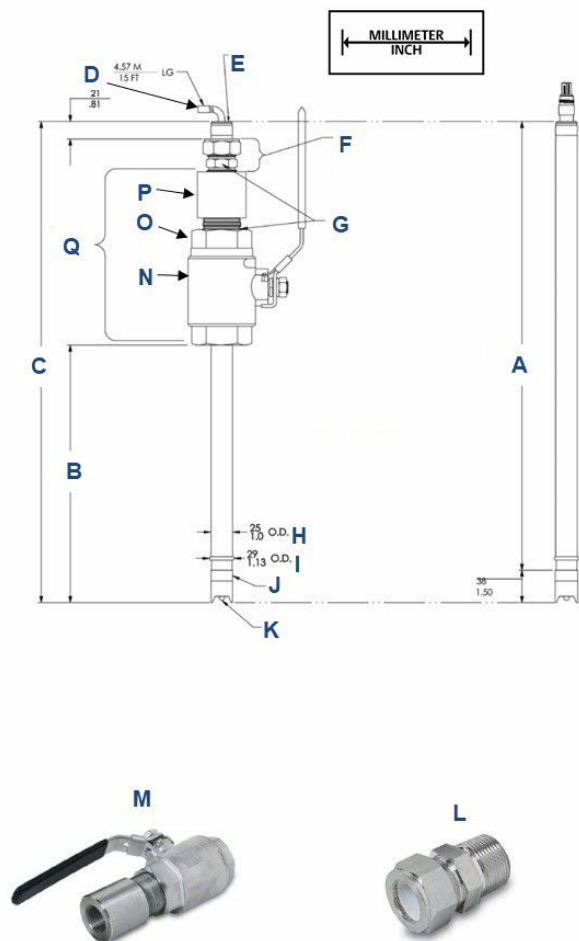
Rosemount 3300HT Sensor Dimensional Drawing: Standard Hemi Bulb Sensor
